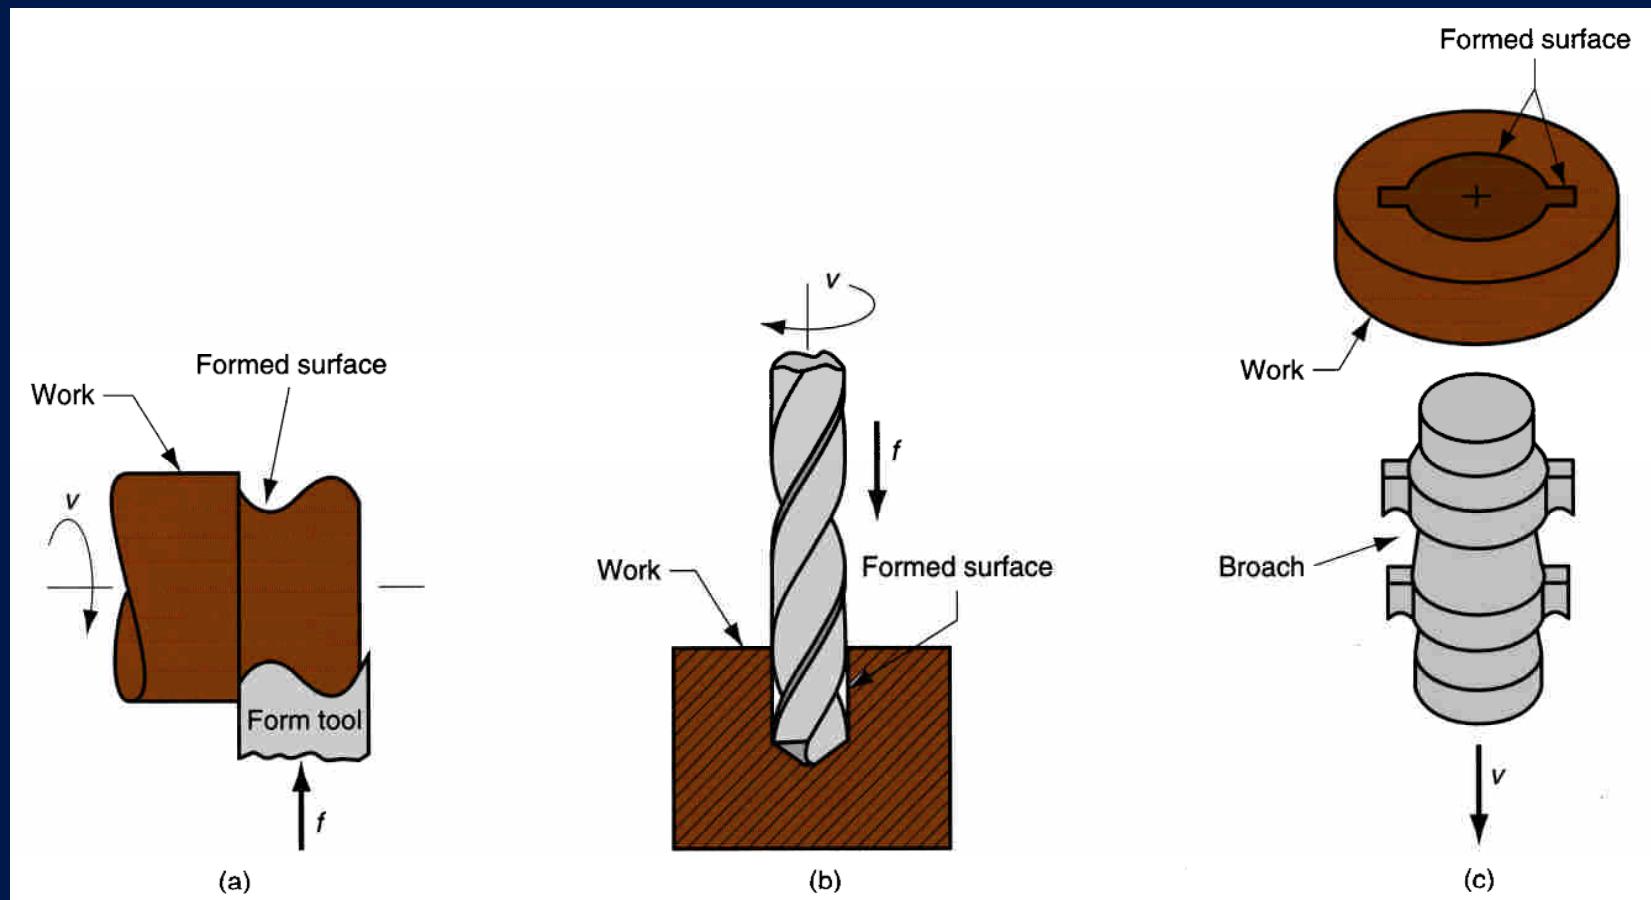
Forming to create shape: (a) form turning, (b) drilling, and (c) broaching
